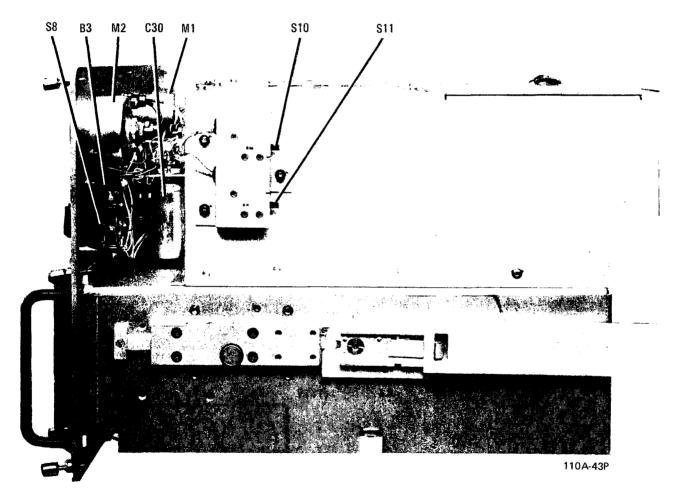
Main Chassis Assembly 1A1, Part No. 1932-3100, Component Locations - Left Side View
